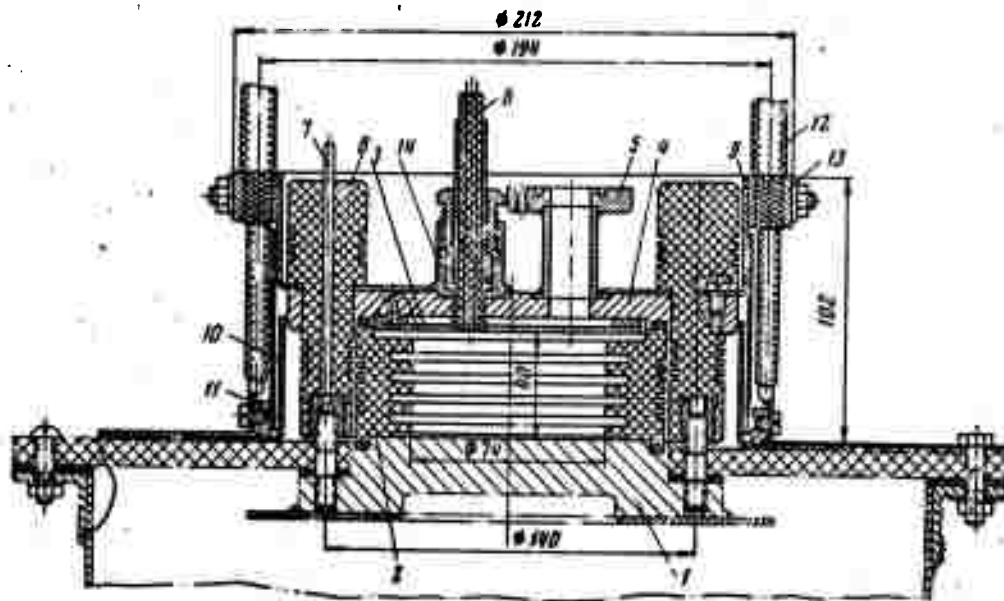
Vacuum spark gap. 1, 3 - electrodes, 2 - insulator, 4 - flange, 5 - vacuum connecting pipe, 6 - control electrode, 8 - insulated bolts, 9, 11 - busses, 12 - cables, 13 - clamp strips, 14 - bushing.
